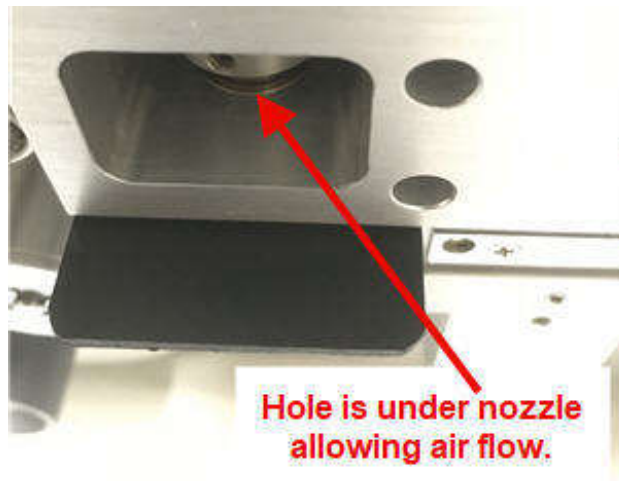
Nozzle Seal Tool with Hole Under the Nozzle
